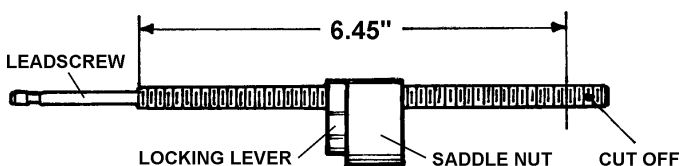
The leadscrew is shortened so that the thread length is 6.45". By threading on the locking lever and new saddle nut before making your cut, you will not have to worry about getting them started over a cut-off thread end. (Note: thrust and handwheel not shown.)
